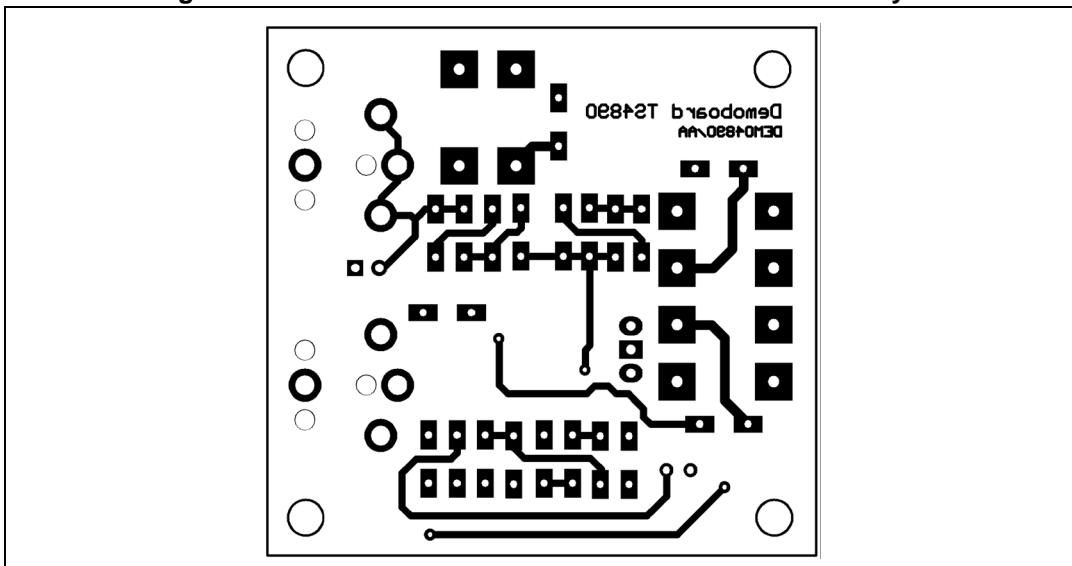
SO8 and MiniSO8 demoboard top solder layerFigure 108. SO8 and MiniSO8 demoboard bottom solder layer
